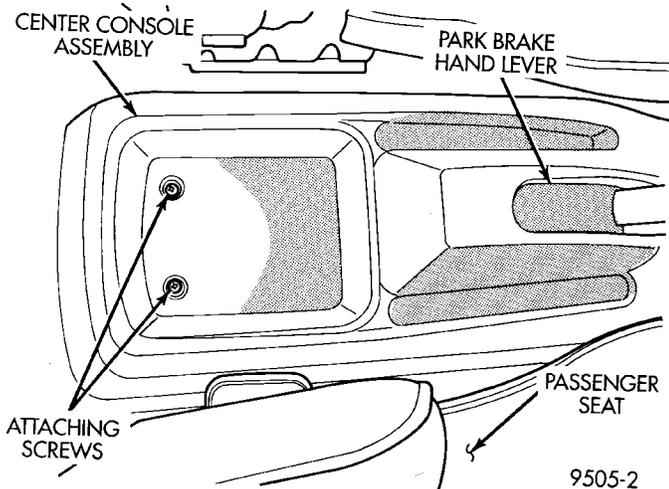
Center Console Rear Attaching Screws W/O Arm Rest
